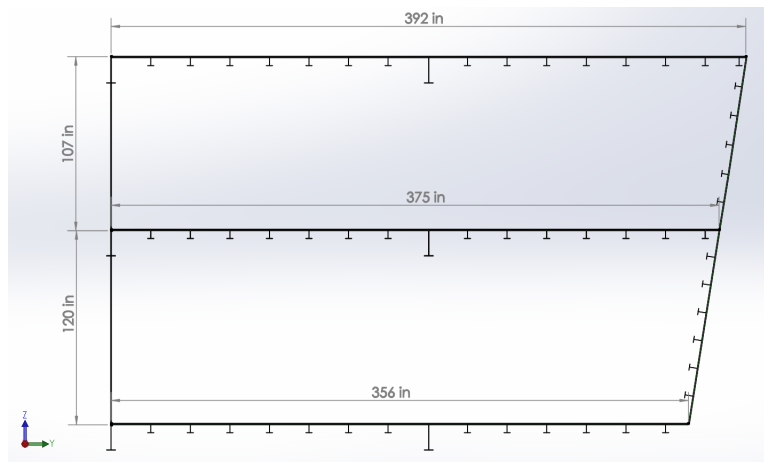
Solidworks 2 Dimensional Structure Viewed Looking Aft
